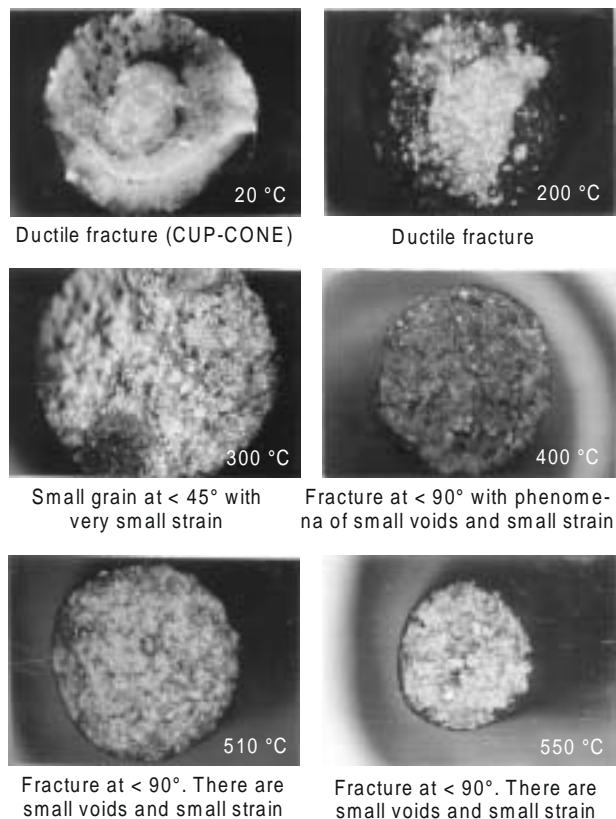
The looks of fractures surface for tensile testing at room and elevated temperatures - optical stereo microscope. Drawing samples, increase 16x
